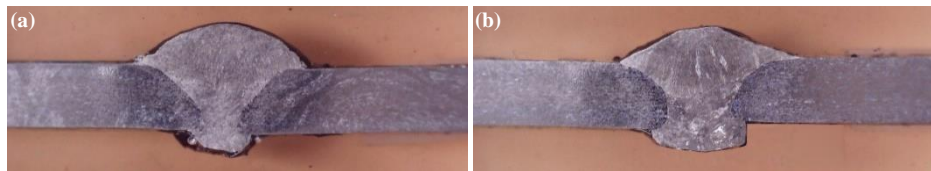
The macrographs illustrating the weld cross-sections of the welds produced: (a) the lower and (b) the higher heat input joint.
